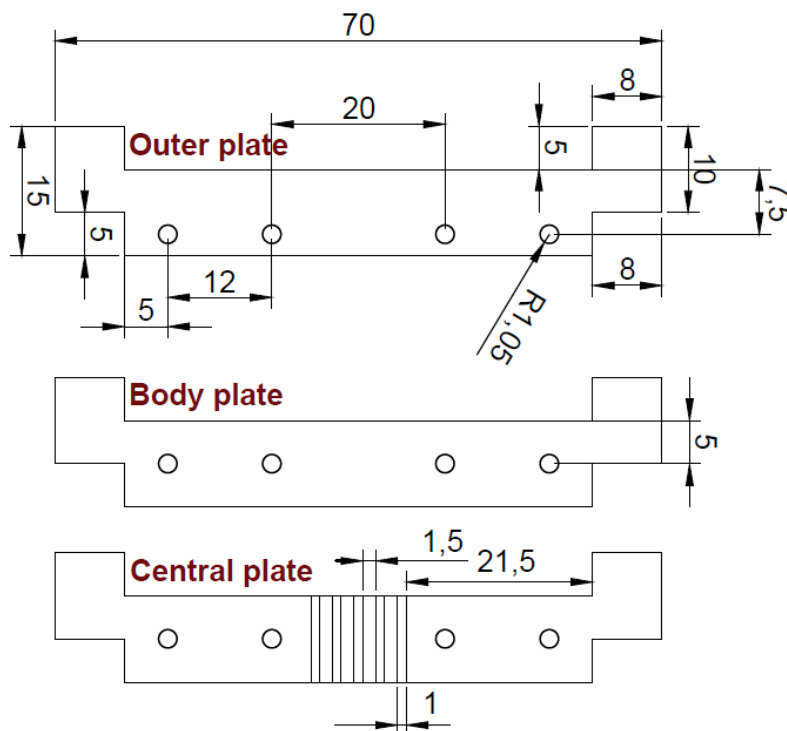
Drafts of the collimator plates. Outer plates have shifted mounting holes. It provides precise assembling of the blocks
